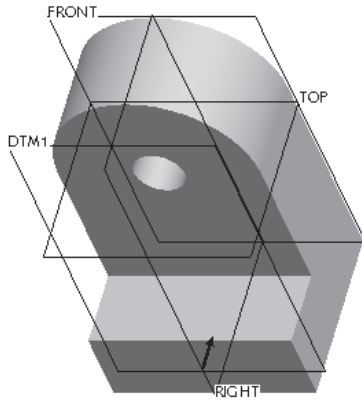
Arrow on DTM1 showing the direction of viewing the sketching plane
